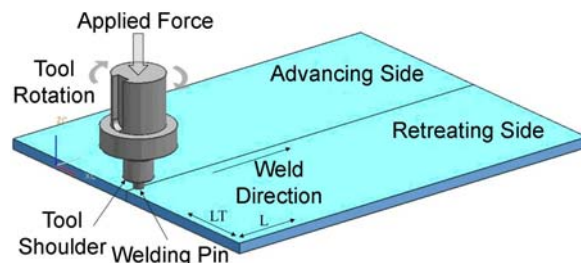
Schematic of butt-weld geometry and FSW orientation.
